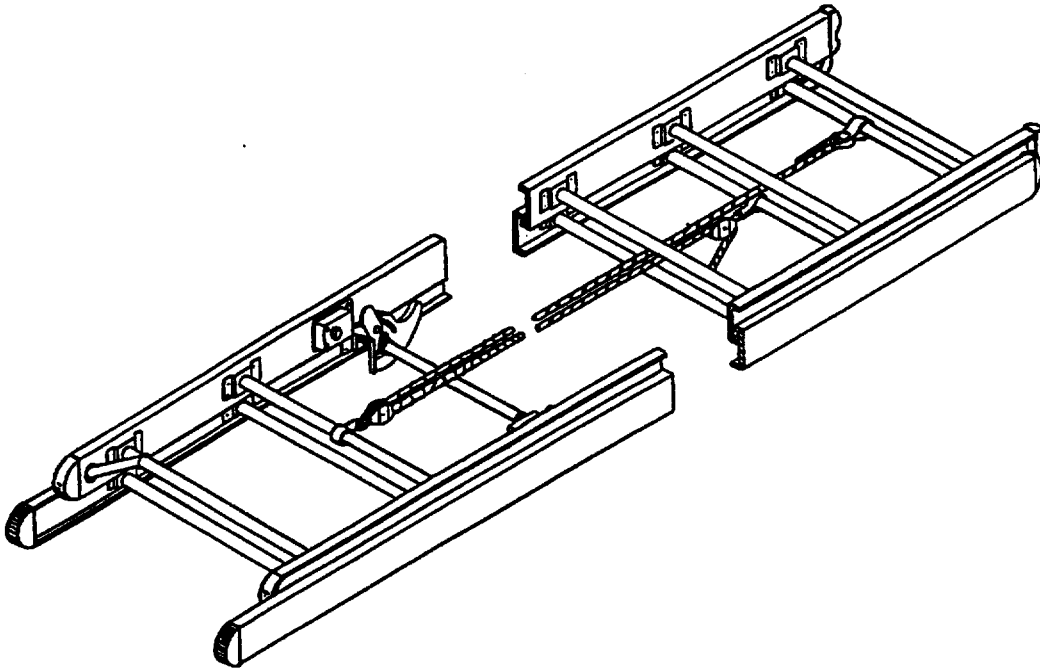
Double-Pulley Arrangement for E Extension Ladder (Fiberglass)
